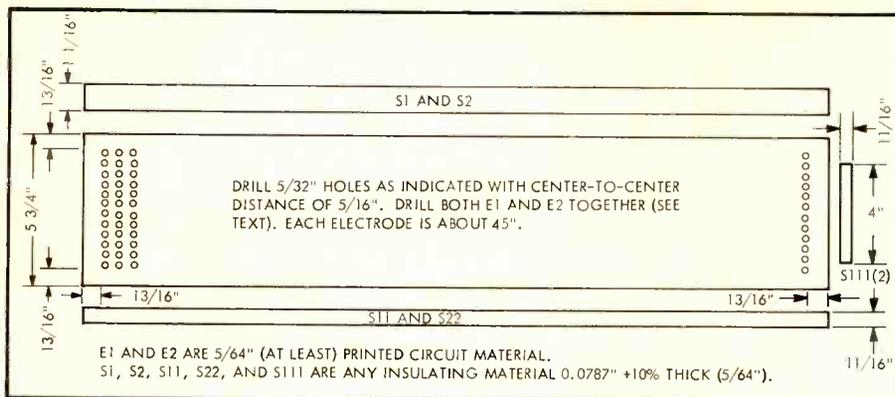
Dimensions and hole pattern of both electrodes and dimensions of the spacers. Only one each of the electrodes and spacers are shown; two are required.
